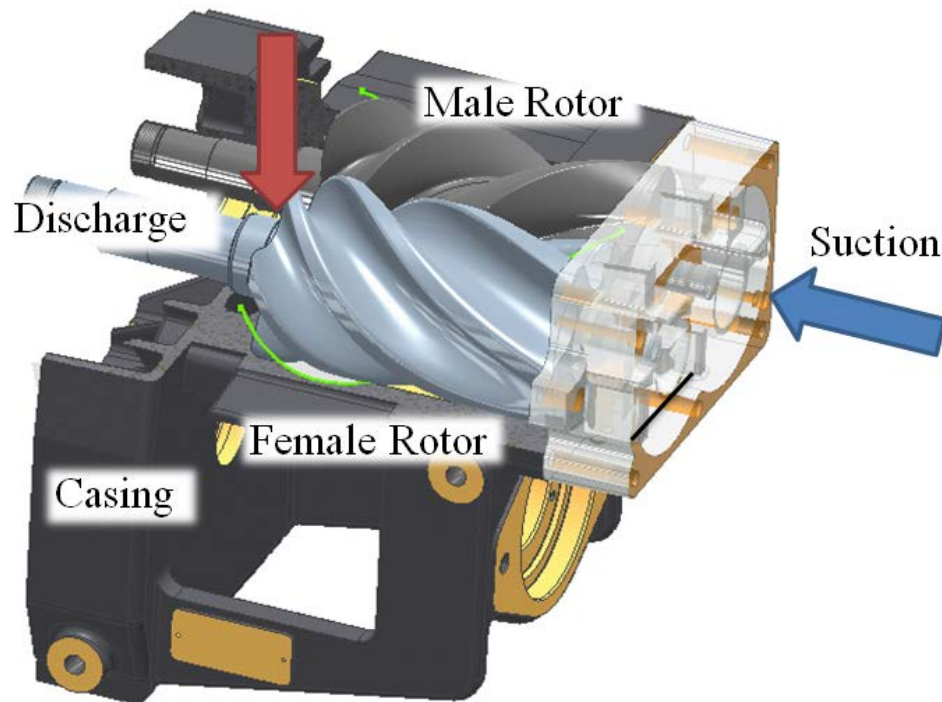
Meshing of Uniform Pitch Twin Screw Rotors
